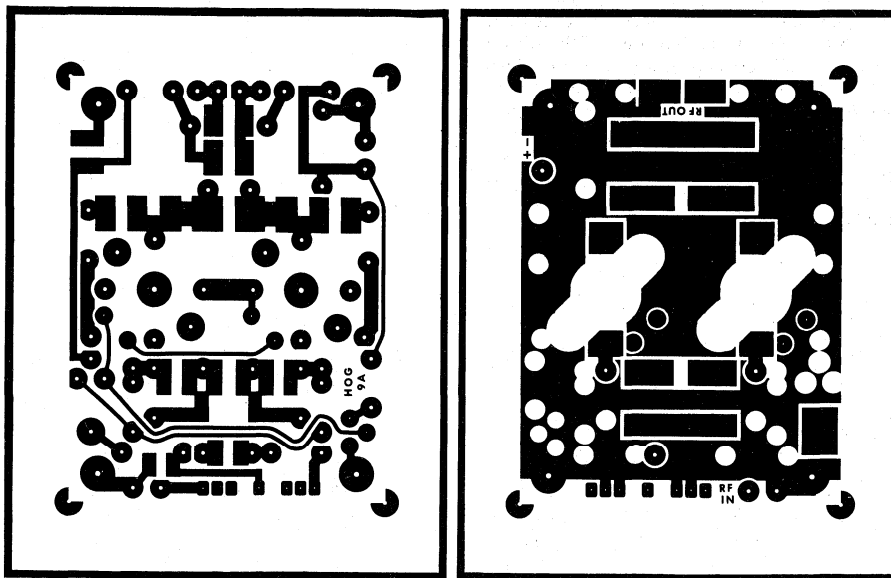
PCB Layout of 20 W, 55 dB High-Performance Driver
